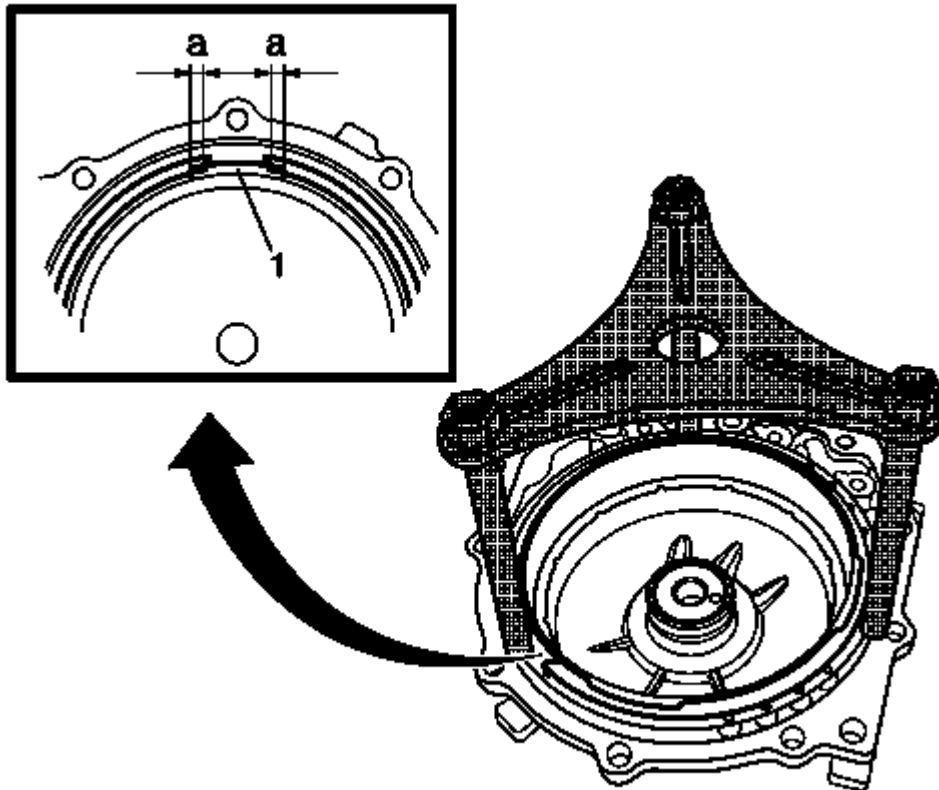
Identifying O/D And 2nd Coast Brake Return Spring
